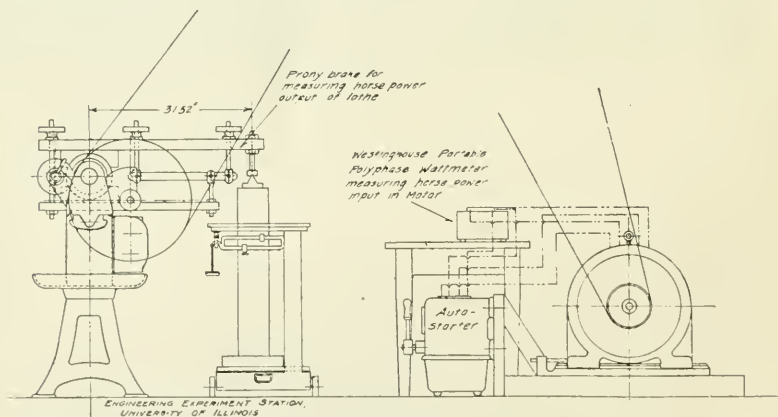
ARRANGEMENT OF APPARATUS FOR MEASURING POWER ABSORBED BY FRICTION IN THE LATHE, COUNTER-SHAFT AND BELTING
